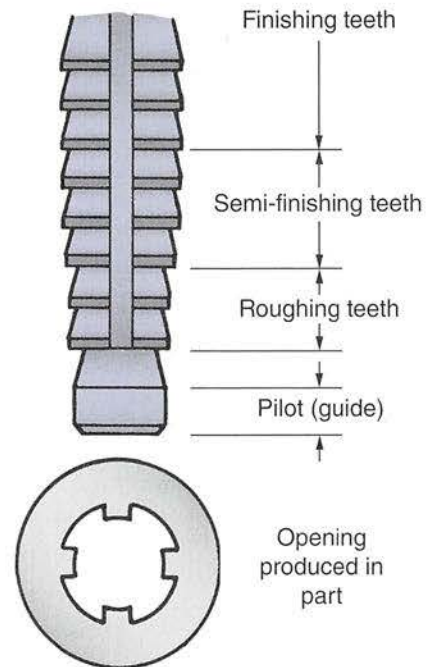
Each tooth on a broaching tool removes only a small portion of the material being machined.
